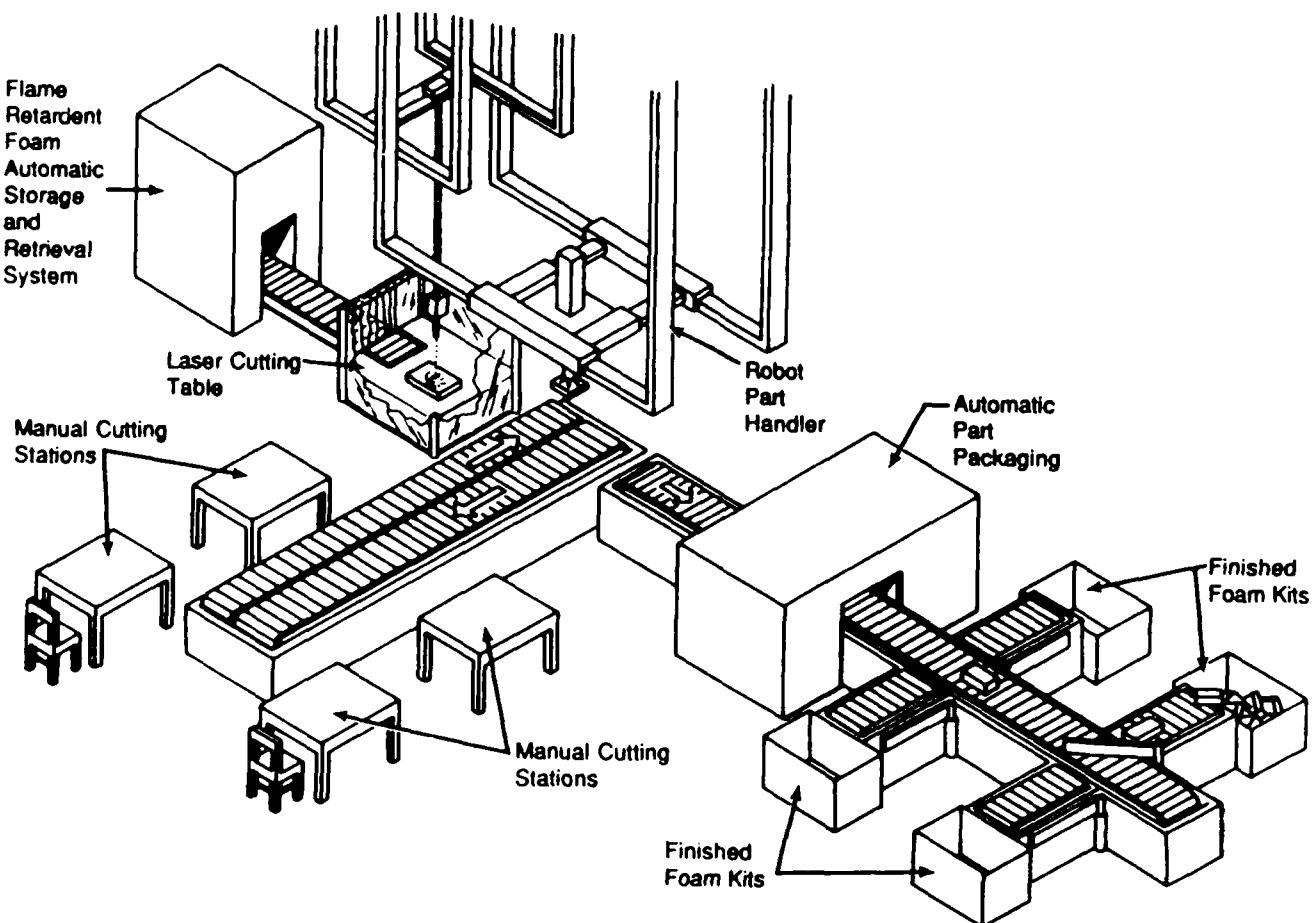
AUTOMATED FOAM CUTTING SYSTEM. The system hardware includes a foam storage and delivery system, material handling equipment, cutting equipment (laser and/or water jet and rotating knife), robotic manipulators, and marking and packaging equipment.
